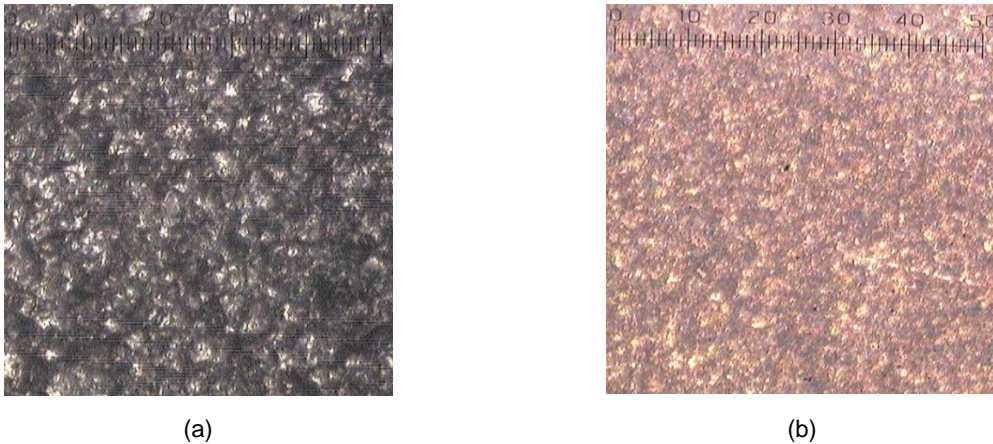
Proof body microscopic view for the multiple electrical signature experiments. (a) Workpiece machined surface and (b) Electrode machined surface. Note, global scale dimension equal to 0.25 mm.
